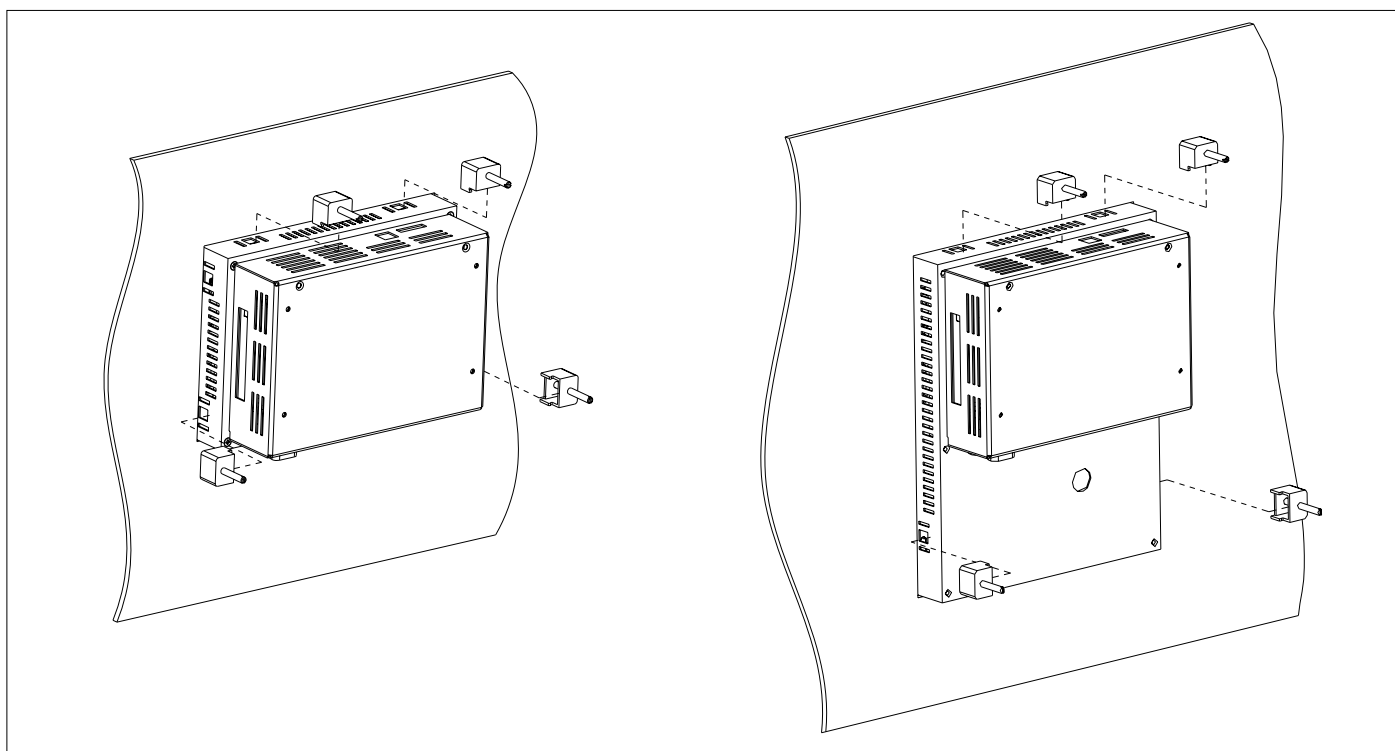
Panel mounting GF_VEDO ML 65CT / GF_VEDO ML 65CK
